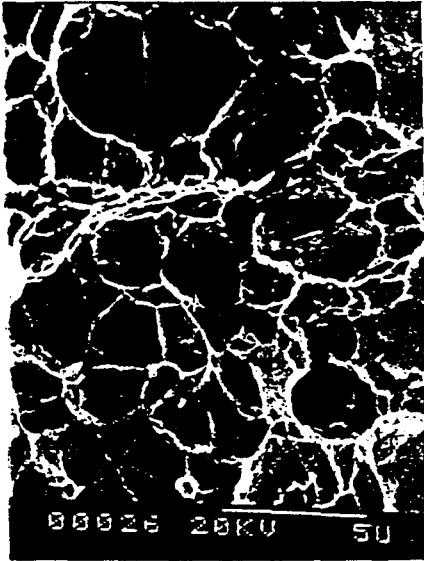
Fracture surface of STS 304 impact specimen at 22°C
